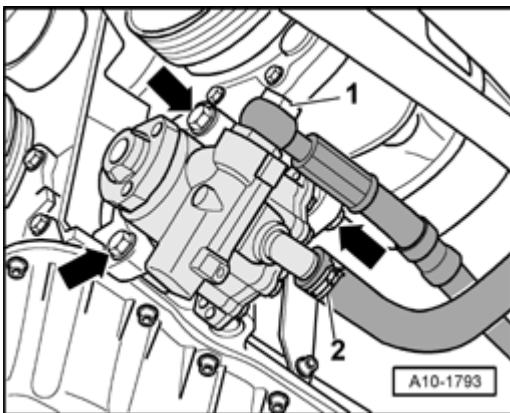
Removing Bolts And Power Steering Pump From Bracket
